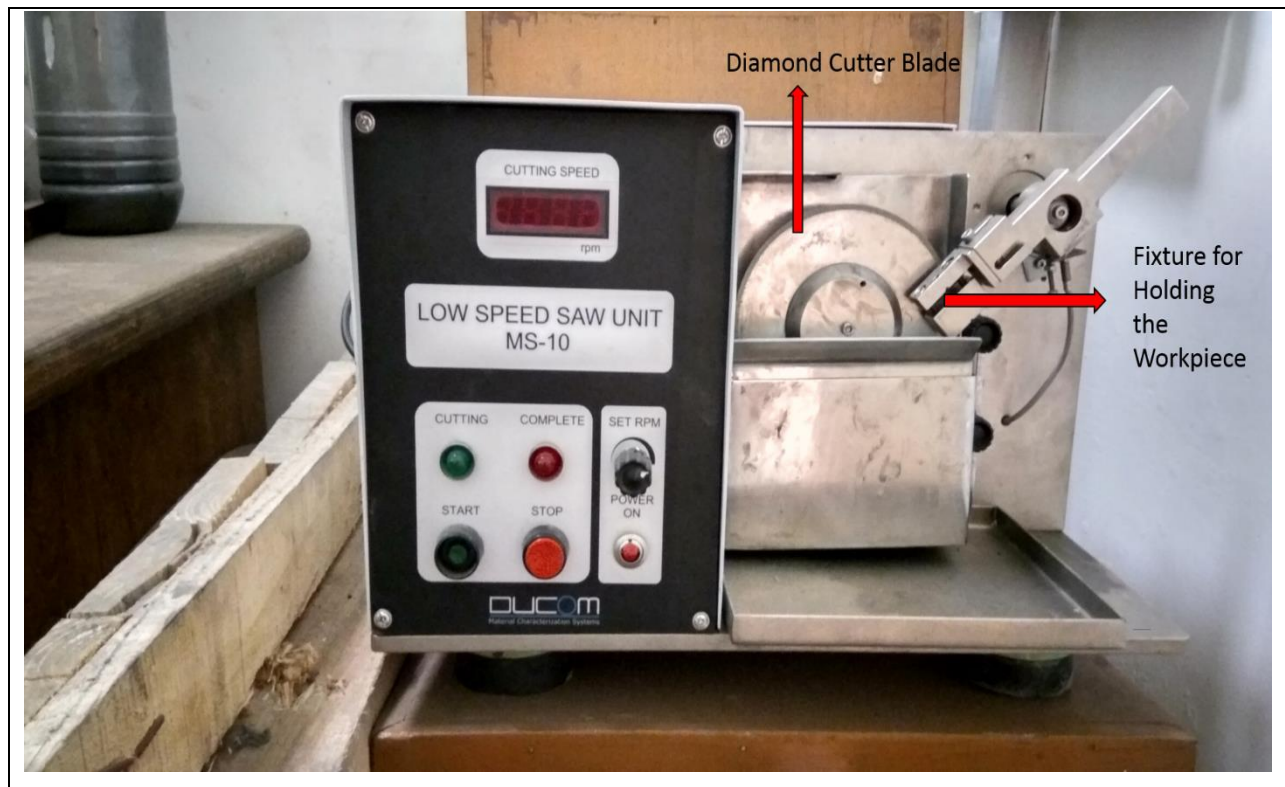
Diamond cutter used for cutting the samples. (Courtesy: Microwave Processing Lab, Thapar University).
